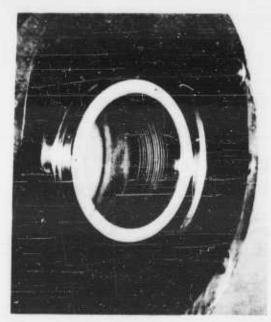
Glass Impregnated Teflon Face, Type 347 Stainless Steel Bellows Seal
